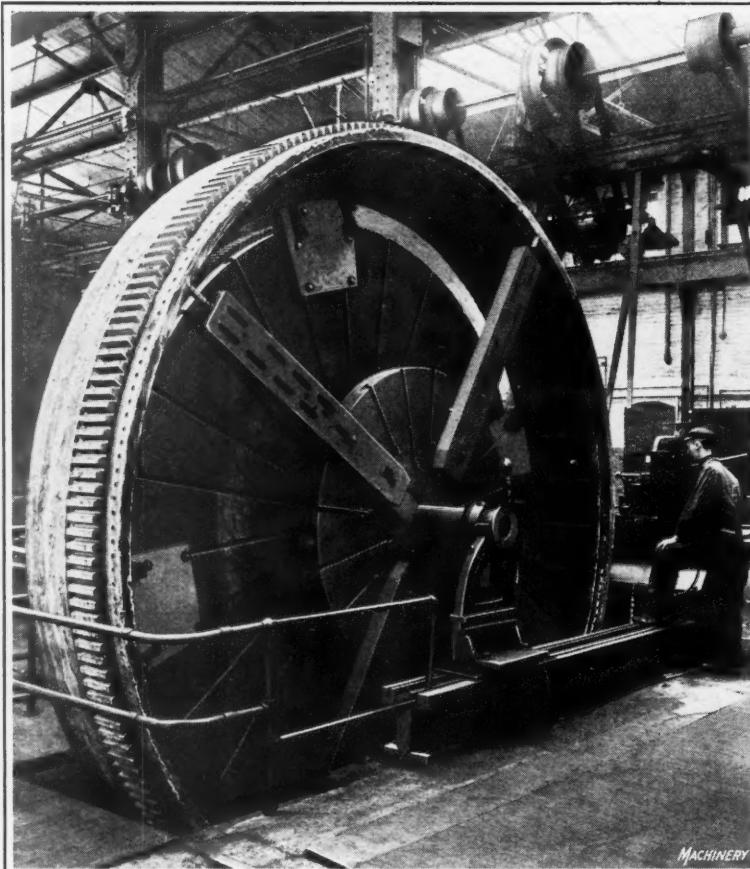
Gear Planer provided with a Pit for swinging Large Gears
